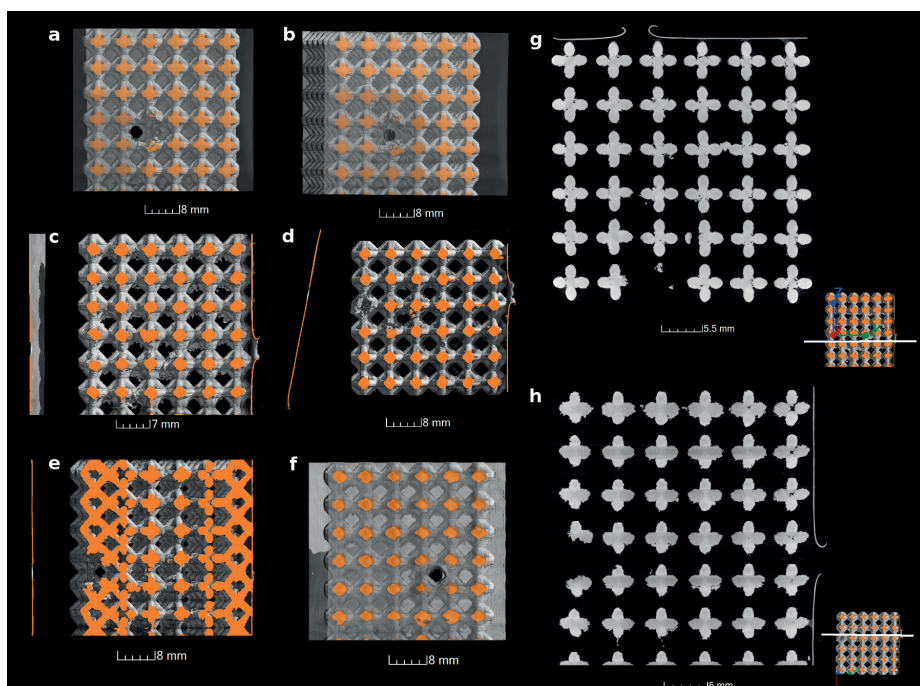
Cross-section of tested sample 6. Front view with transparent bumper aligned to a) lattice main axis and b) projectile trajectory, c) right view aligned to lattice main axes, d) top view, e) right view perpendicular to bumper, f) rear view with transparent skin aligned to lattice main axes, g) HD CT-scan image of the top view at the impact hole level (cross-section in d)), h) HD CT-scan image of the right view at the impact hole level (cross-section in c)). Reproduced from [216].
